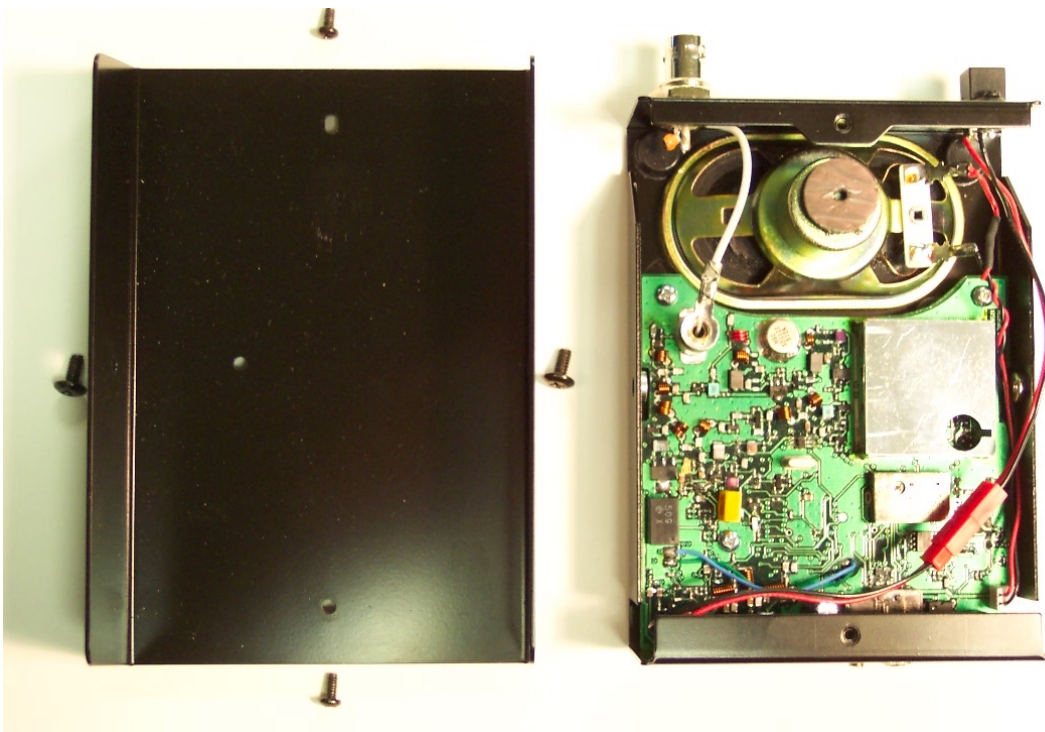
D with case bottom off to show printed circuit board installation
